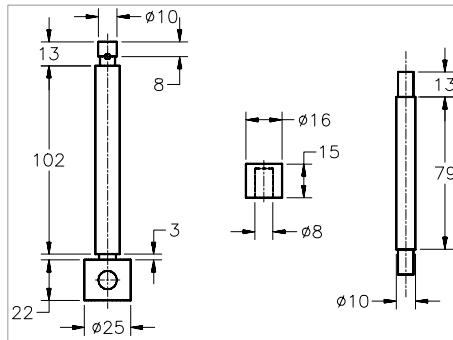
Dimensions of the Clamp Screw, the Handle Stop, and the Clamp Screw Handle
